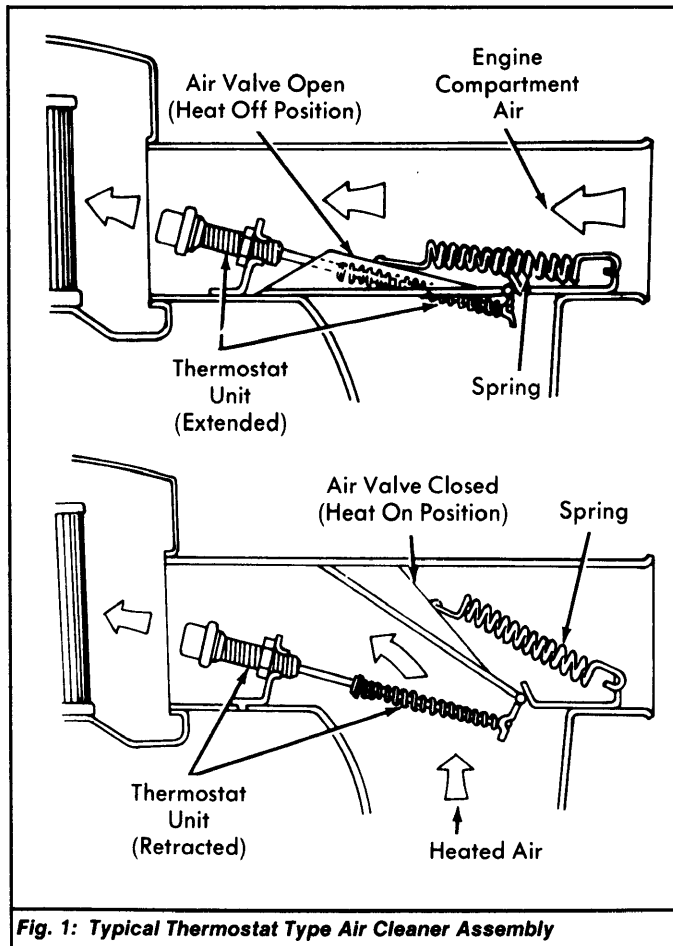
Typical Thermostat Type Air Cleaner Assembly
